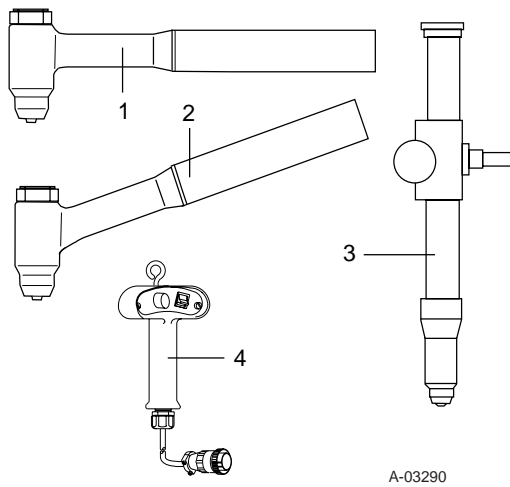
B Type 4B LO-AMP Gas Cooled Torches
